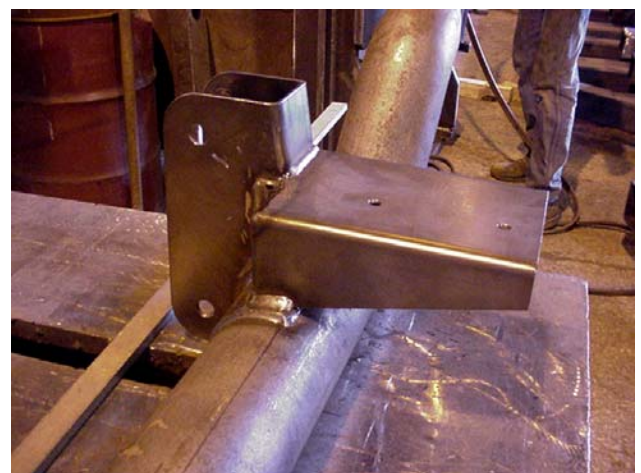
Steel interface-bracket assembly on subplate welded to tube.
